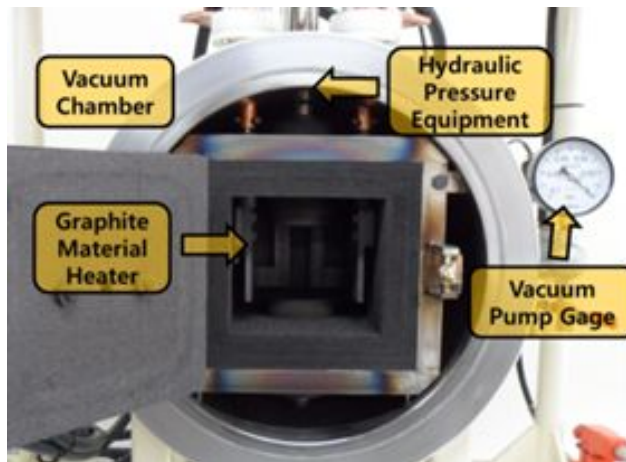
Equipment used to fabrication, vacuum hot press furnace (AVHF-101010-15H, ACE vacuum Co.,Ltd)
